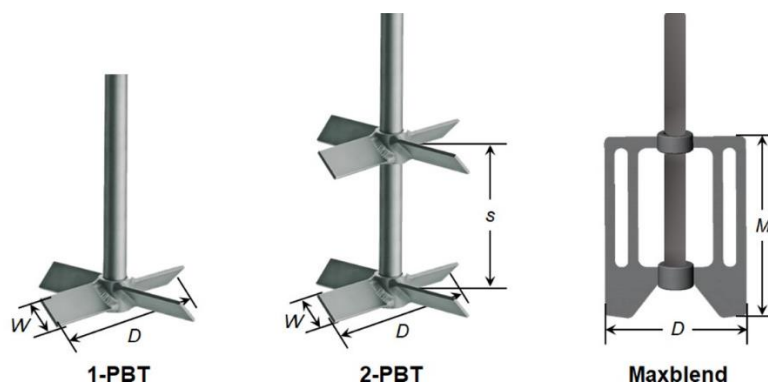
Impeller geometries used by (Chen et al., 2021)
